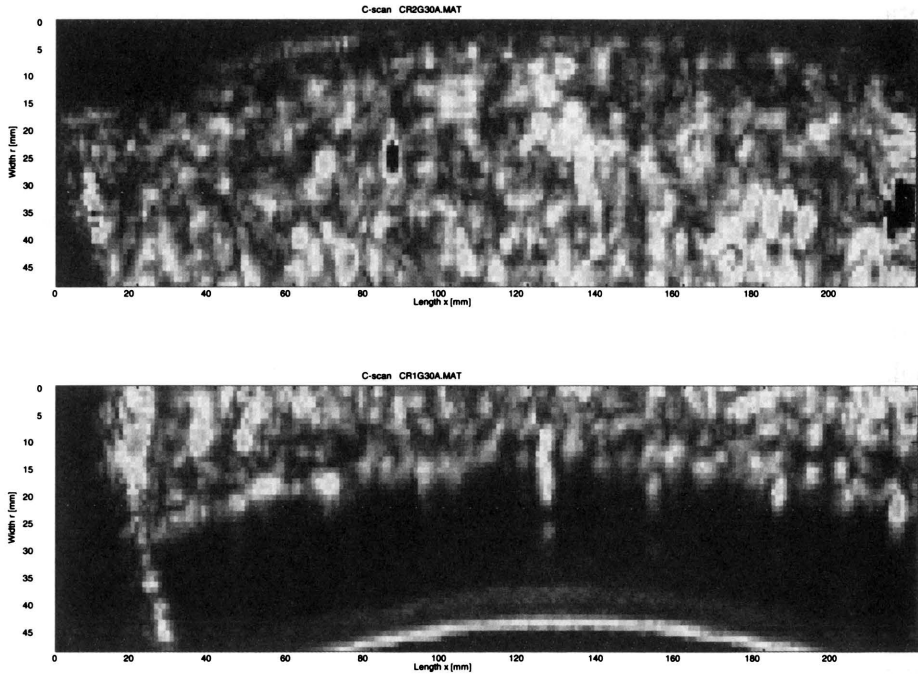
C-scan of an EB weld in copper canister. The upper and lower panel show the outer and inner part of the weld, respectively. Dark area below the weld root corresponds to unwelded parent material.
